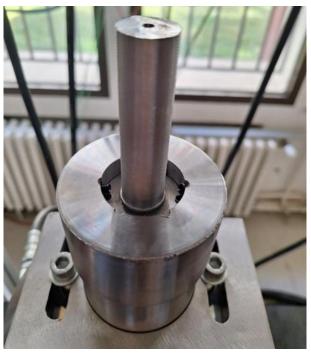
Assembly of the joint and auxiliary components on the pulsator after the first test series.
